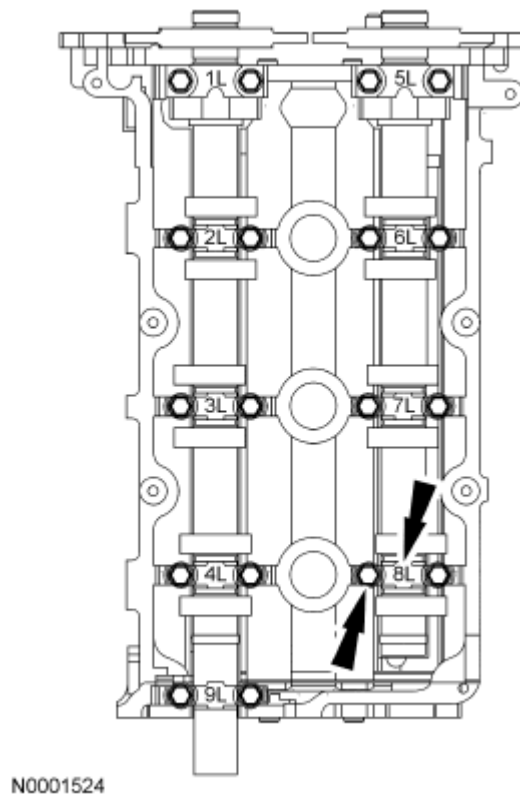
Identifying Camshaft Bearing Caps Bolts Installing Sequence
